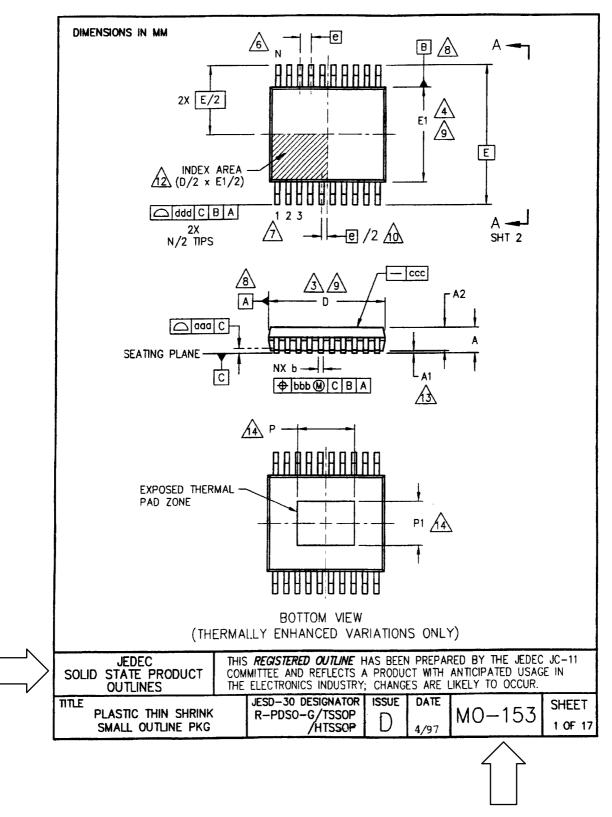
Example of a Registered-Outline Drawing Top Sheet
